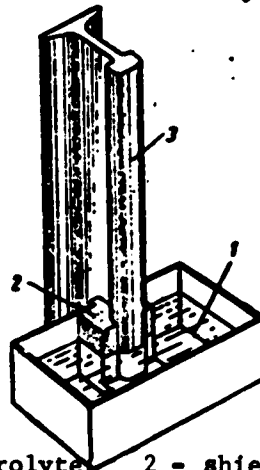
The form of shielding (insulating) bushing for heating the top flange of a rail: 1 - electrolyte, 2 - shielding bushing; 3 - rail
